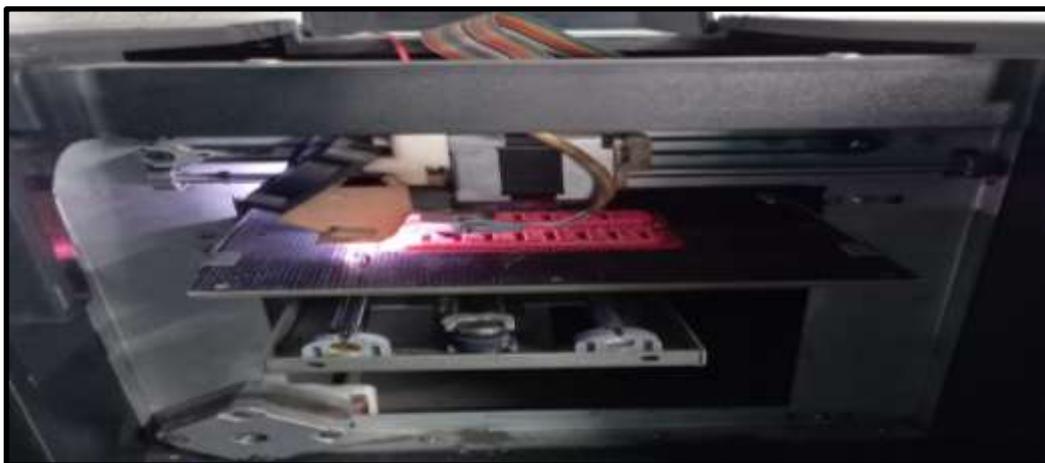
Actual 3D Printing of Right Hand [RH] Header of Flat Plate Shape Microchannel Heat Exchanger
